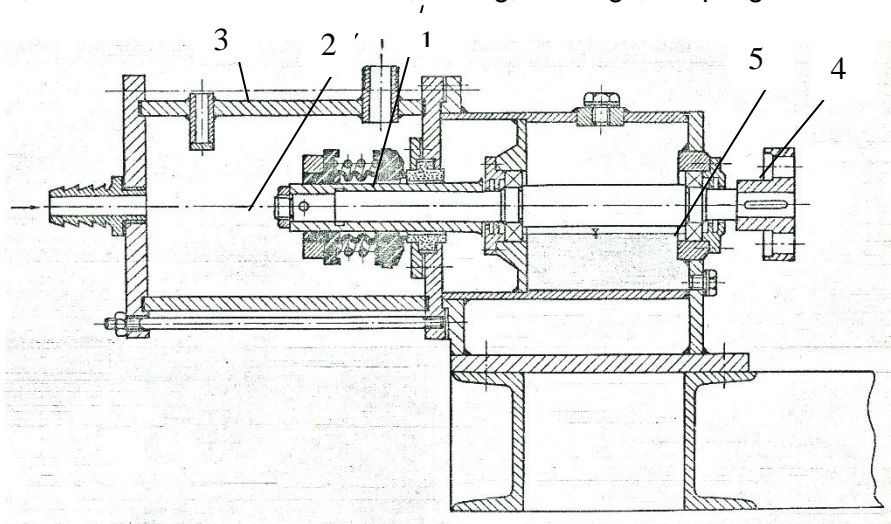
The test bench of a front seal with a shaft diameter of 35 mm 1-seal, 2-shaft, 3-seal chamber, 4-coupling, 5-oil bearing [2]
